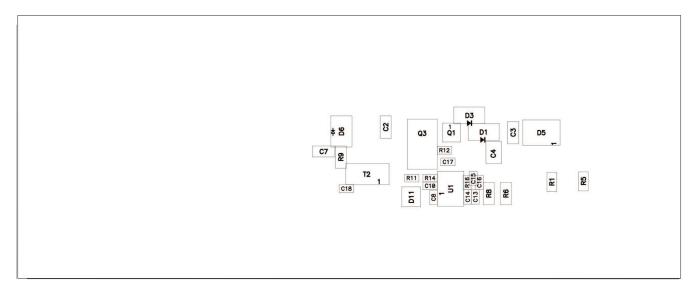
TPS92070EVM-648 Bottom Assembly Drawing (Bottom view)
